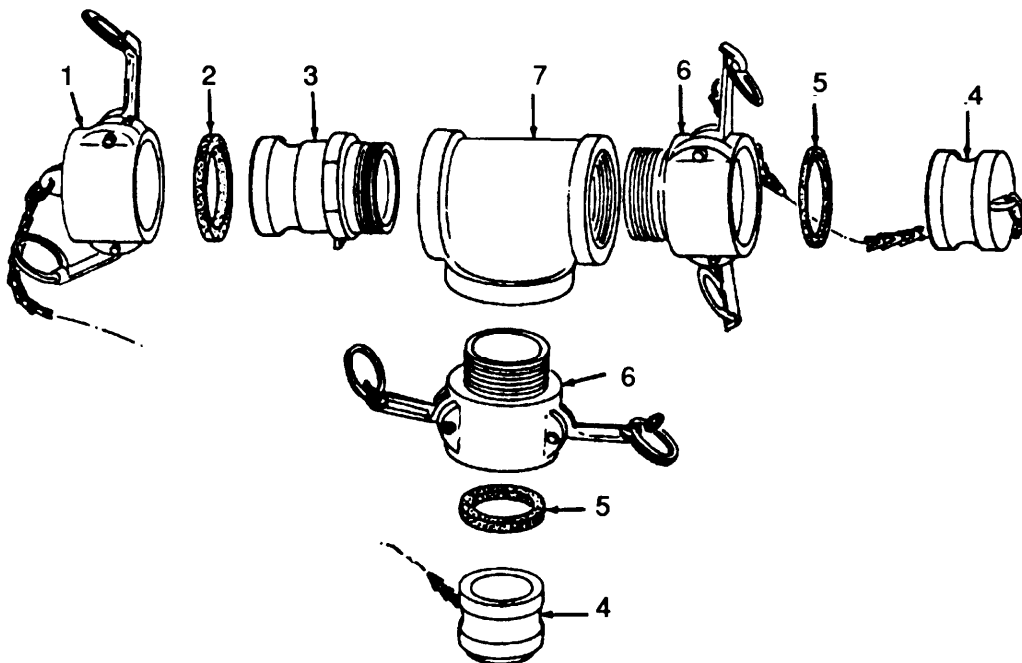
Tee Assembly, Disassembly/Reassembly.
